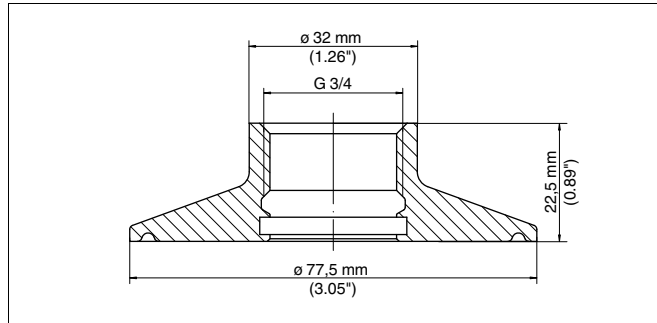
Dimensions adapter G $\frac{3}{4}$  A according to DIN 3852-X on Clamp 2 $\frac{1}{2}$ " PN16 ( $\varnothing$  77.5 mm) DIN 32676, ISO 2852/316L
